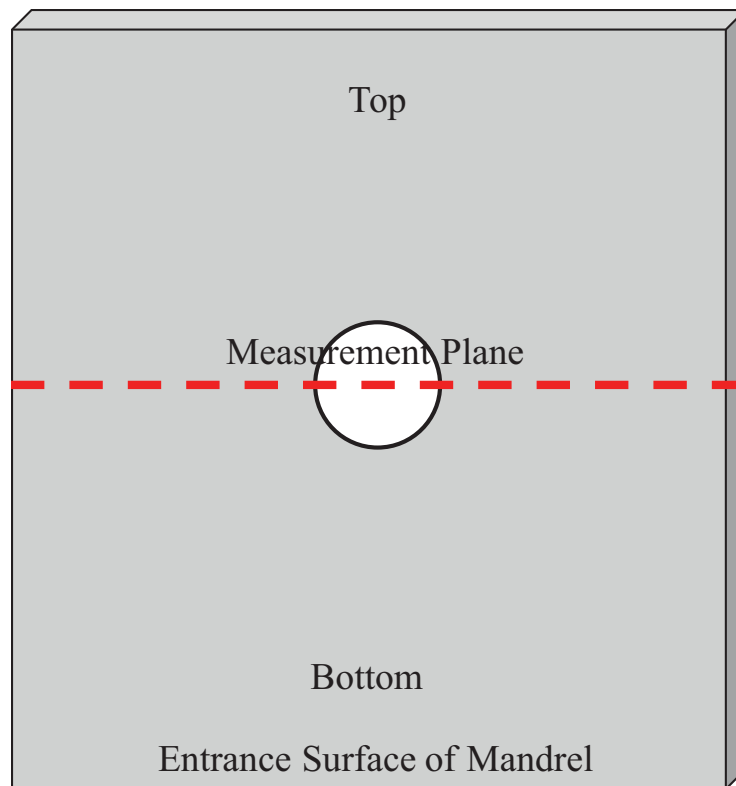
Basic Drawing of Wire EDM Cutting Set-up for Contour Method.
